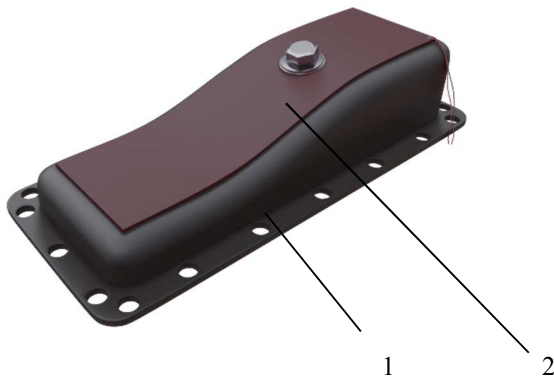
Heater (2) on the crankcase of the combustion engine (1)
